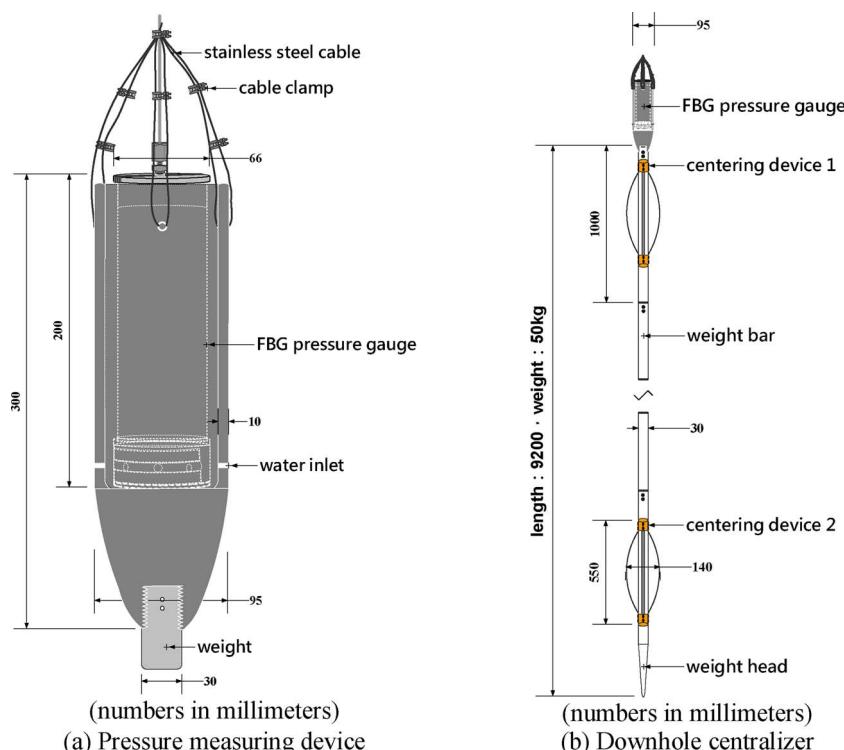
Improved Design of Downhole T-P Coupling Gauge Devices.
